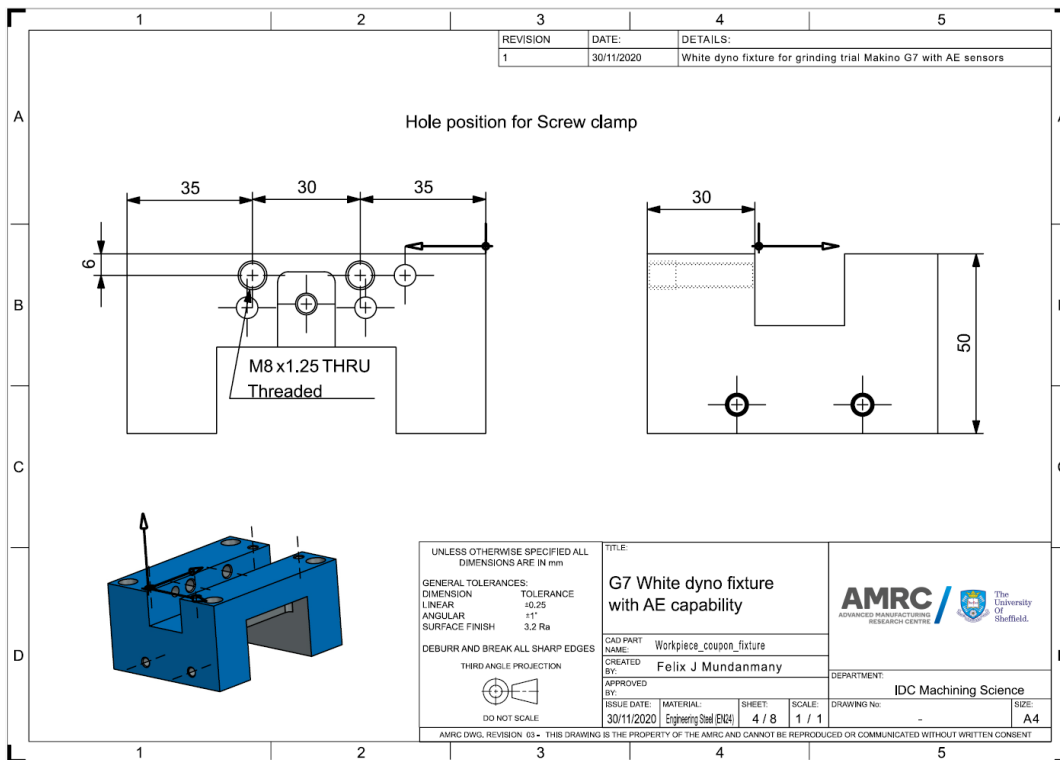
Drawings showing the holes for the screw clamp devised to hold the workpiece in place. A 3 mm clamp plate was also machined to provide enough shim for clamp plate to hold coupon in place once M8 bolts were placed to transfer the clamping force when tightened.
